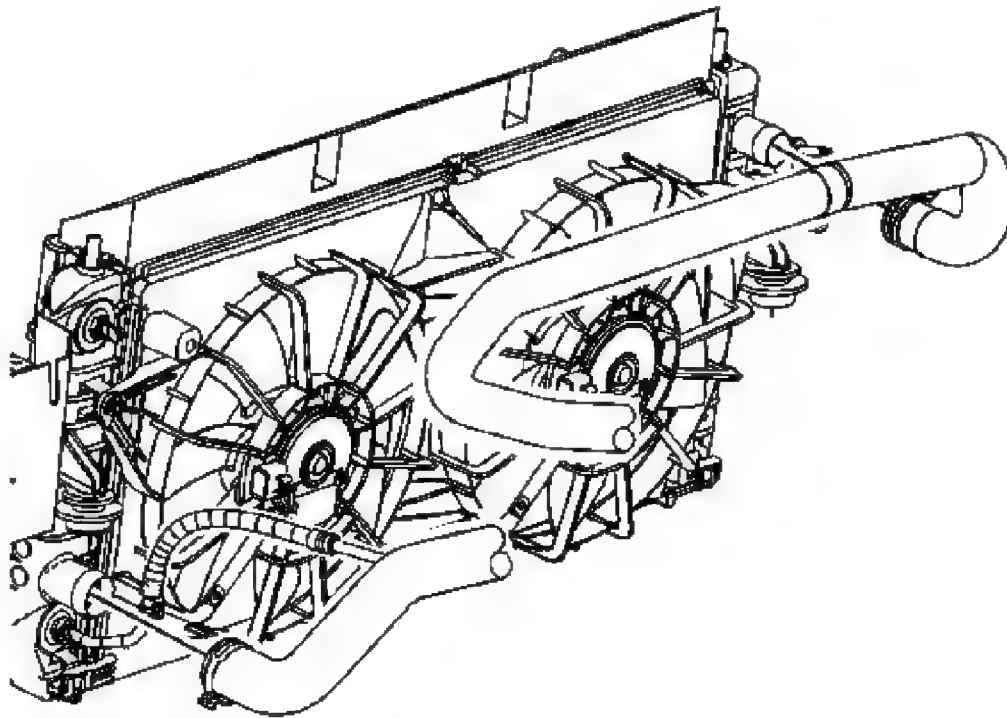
View Of Radiator Inlet & Outlet Hoses
